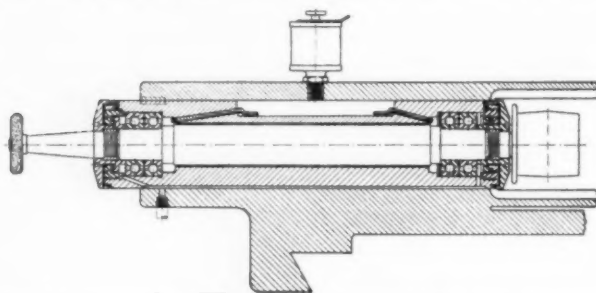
GRINDING-MACHINE SPINDLE EQUIPPED WITH BALL BEARINGS
